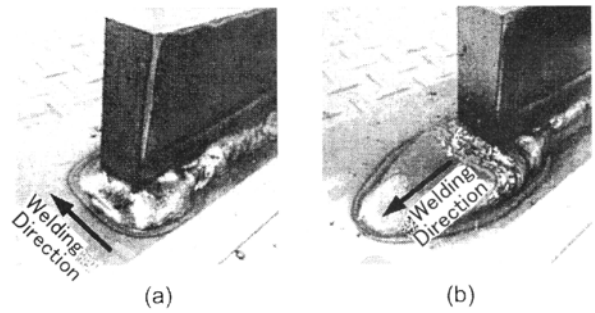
Conventional welding direction (a) and LTT elongated bead welding direction (b)
